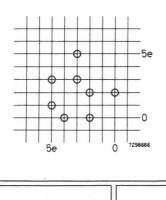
Hole pattern for mounting on a printed-wiring board (e = 0.1")
